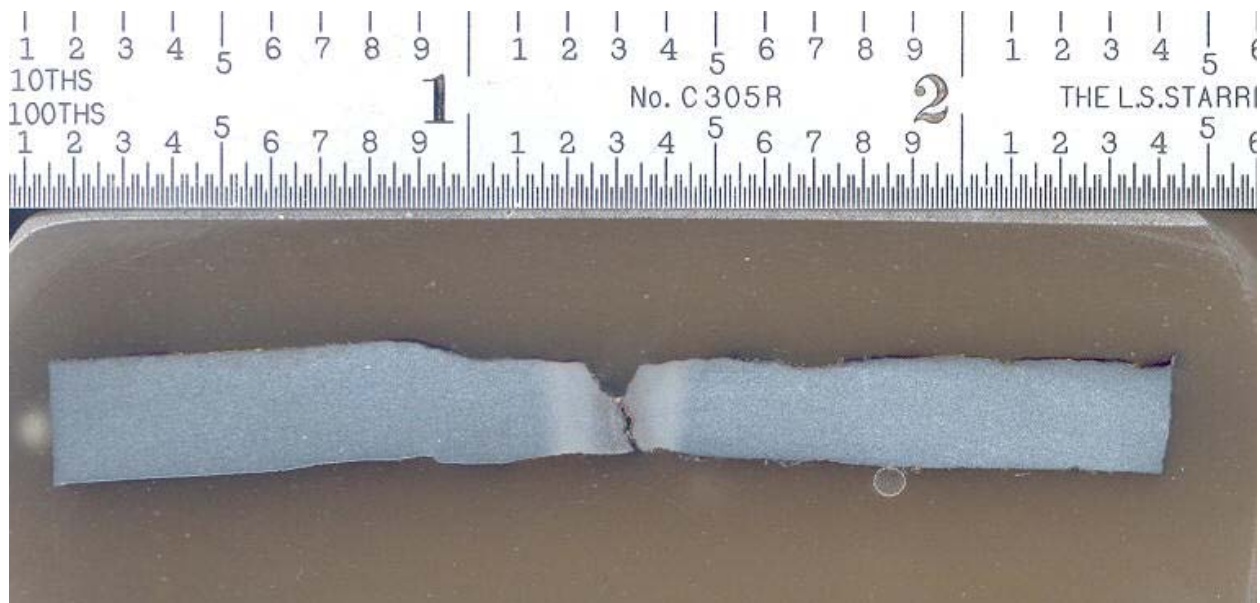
Selective Seam Weld Corrosion in Case Number 2 showing a Relatively Blunt Corrosion Tip
